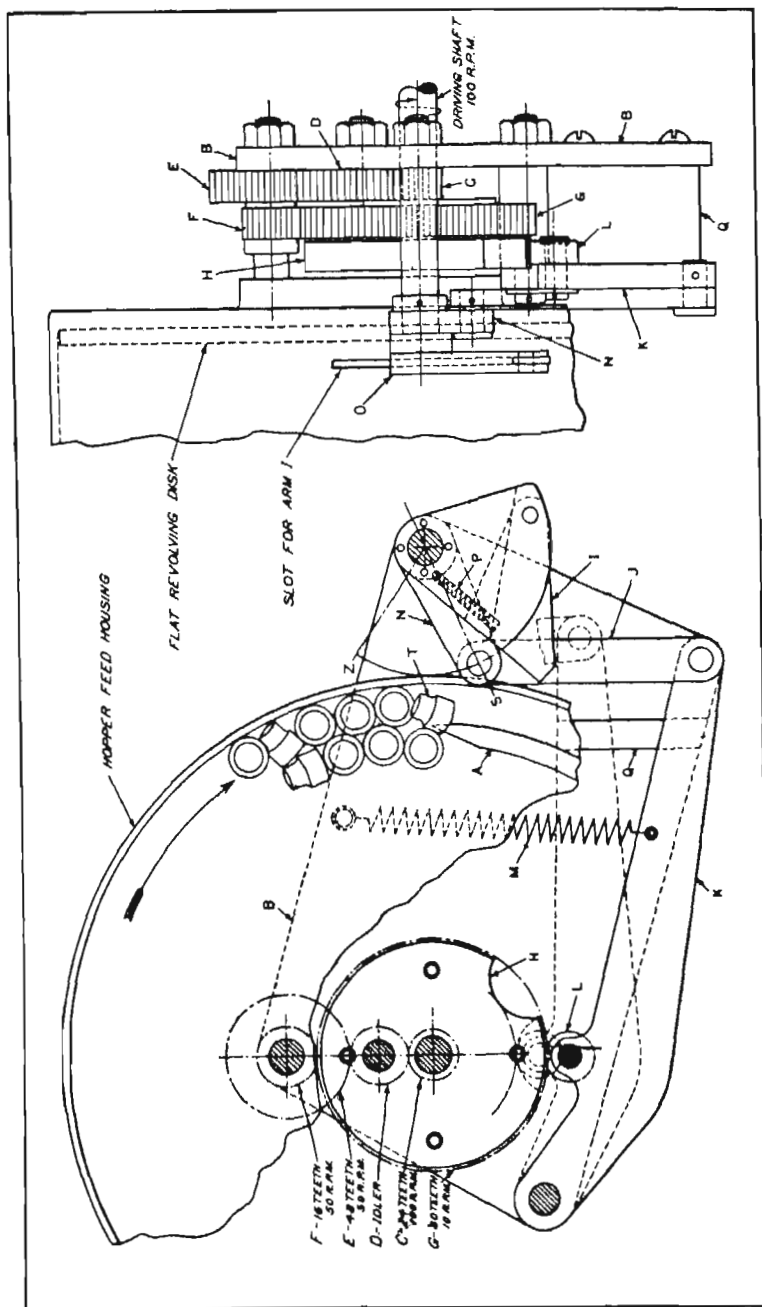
Revolving Disk Type Hopper Feed with Mechanism for Dislodging Clogged Pieces
